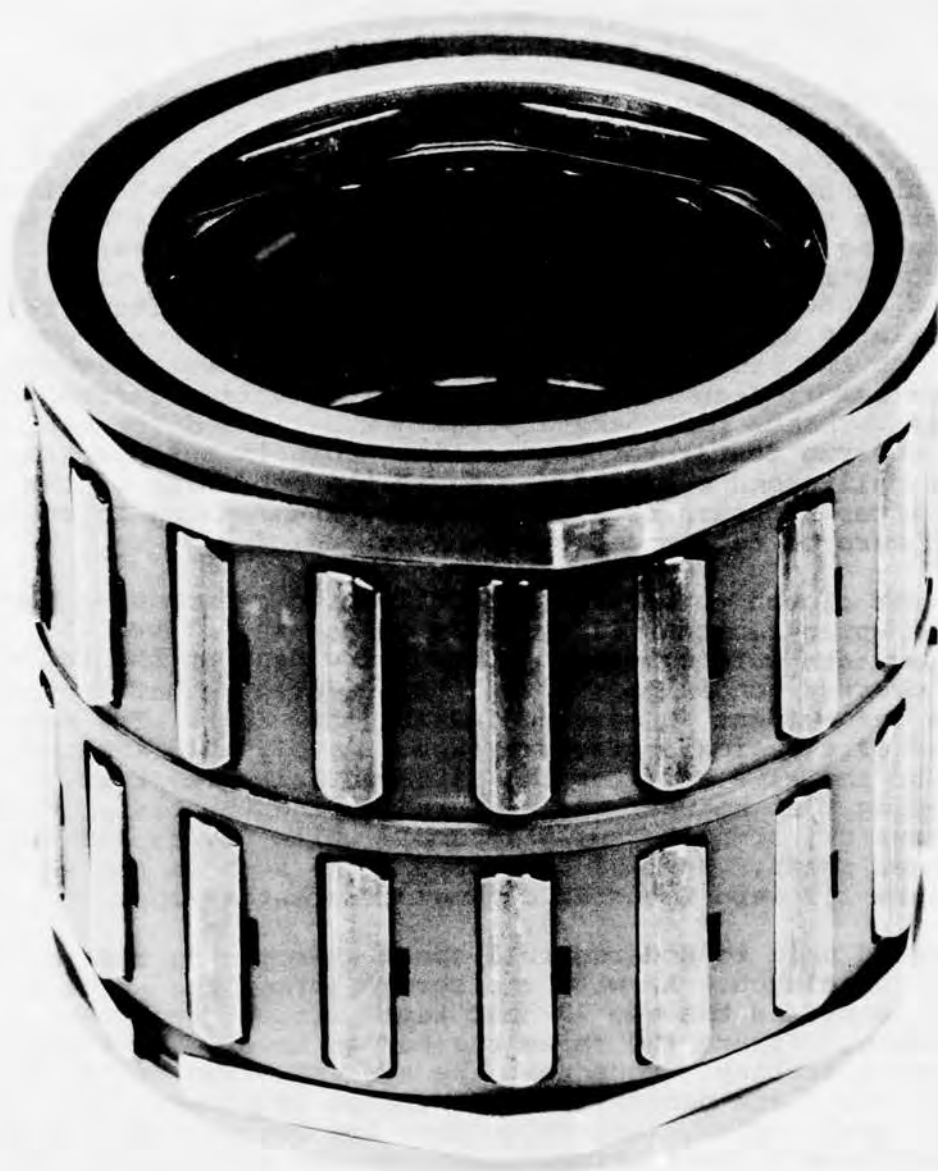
Sprag Assembly After Task II Full-Speed Overrun Tests.
